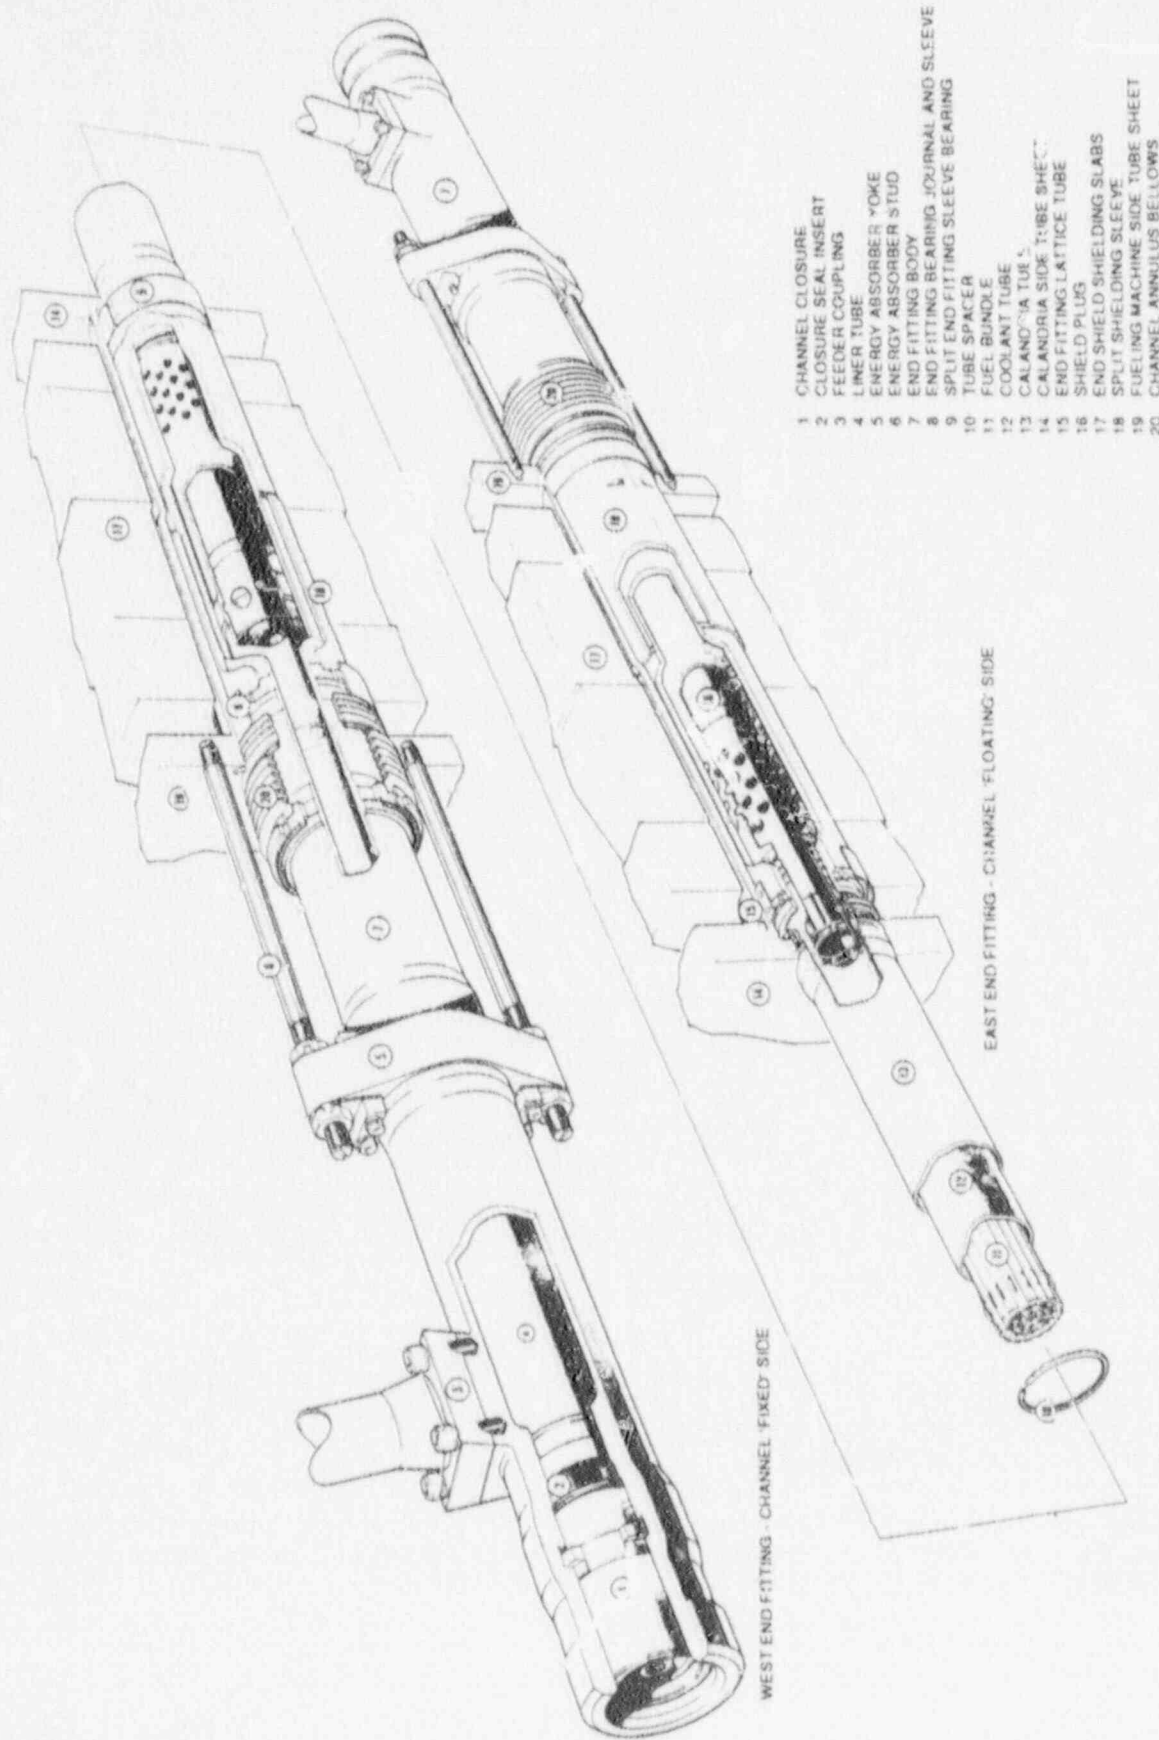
FUEL CHANNEL ASSEMBLY
